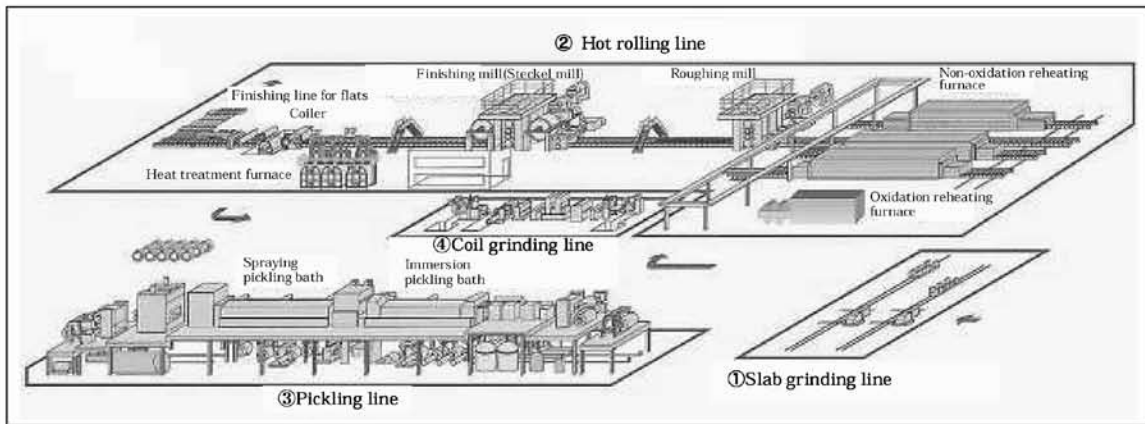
Layout of Hoop strip mill in Hoshizaki Plant.
